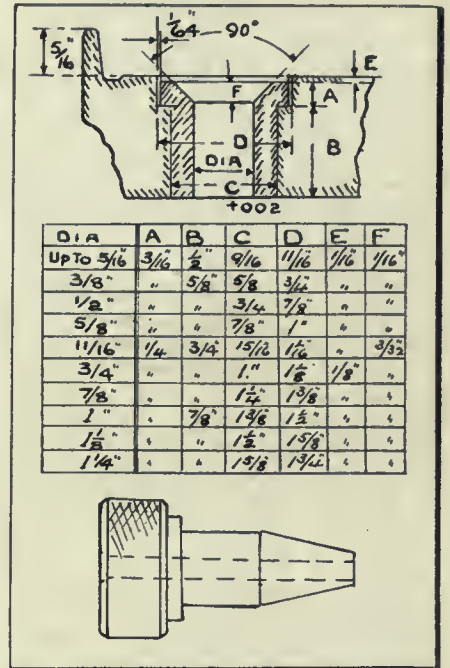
BEST TYPE OF BUSH FOR MULTIPLE SPINDLE WORK.
